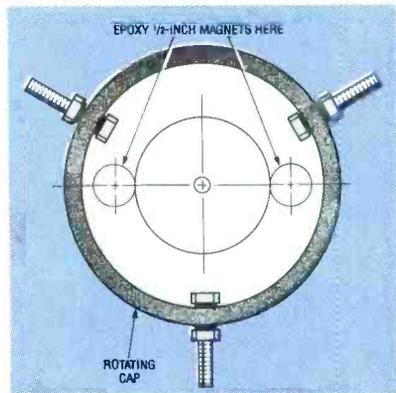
ANEMOMETER MAGNETS. Two 1/2-inch diameter magnets must be epoxied under the top of the rotating cap.
